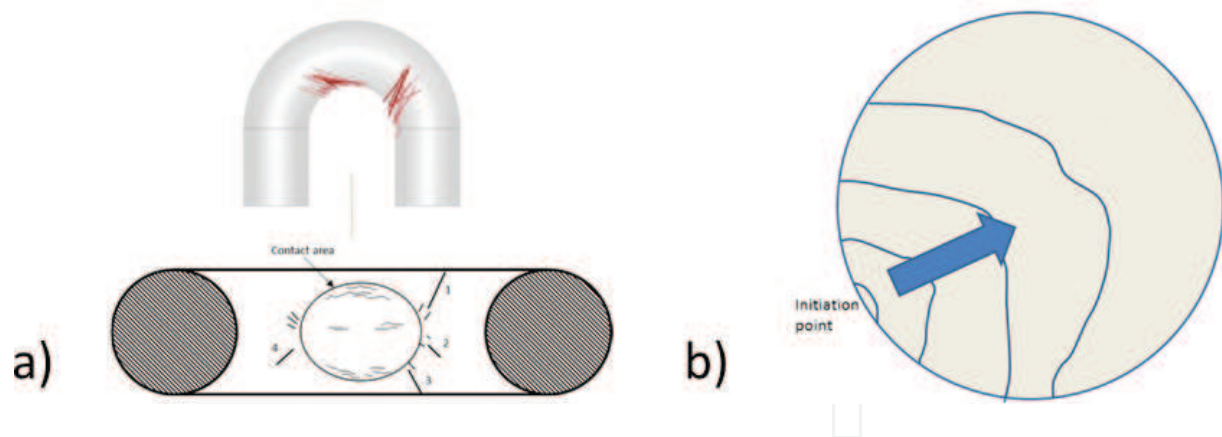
(a) Fretting of contact surfaces between chain links. (b) Fracture surfaces as crack propagates through chain.
